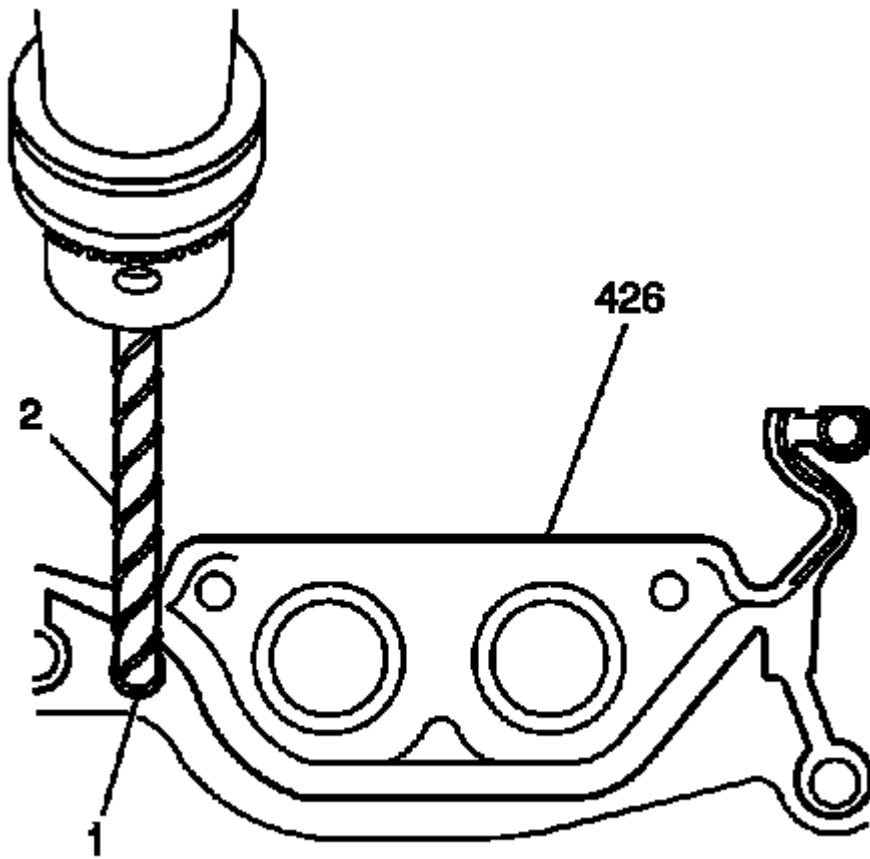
Drilling Out Oil Pan Gasket Retaining Rivets
